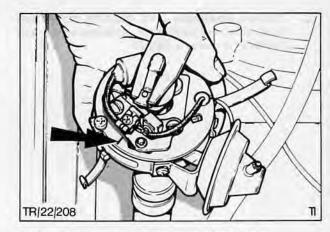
Rotor arm position marked relative to body A – Rotor arm B – Scribed line
